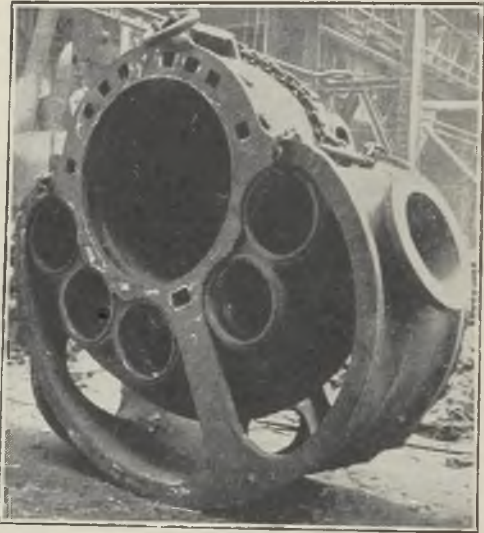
FIG. A.—CASTING SIMILAR TO A LARGE MARINE CYLINDER.
